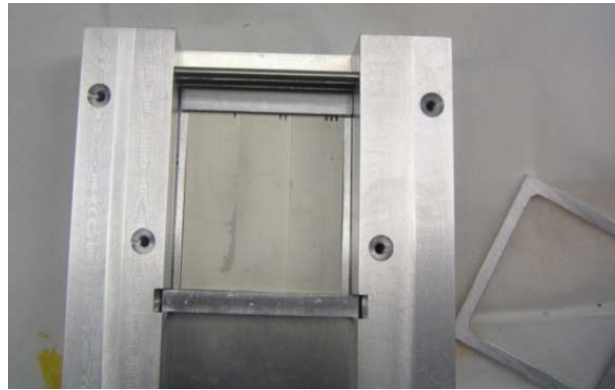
Assembly of nickel-plated aluminum specimens (horn baseline material).
